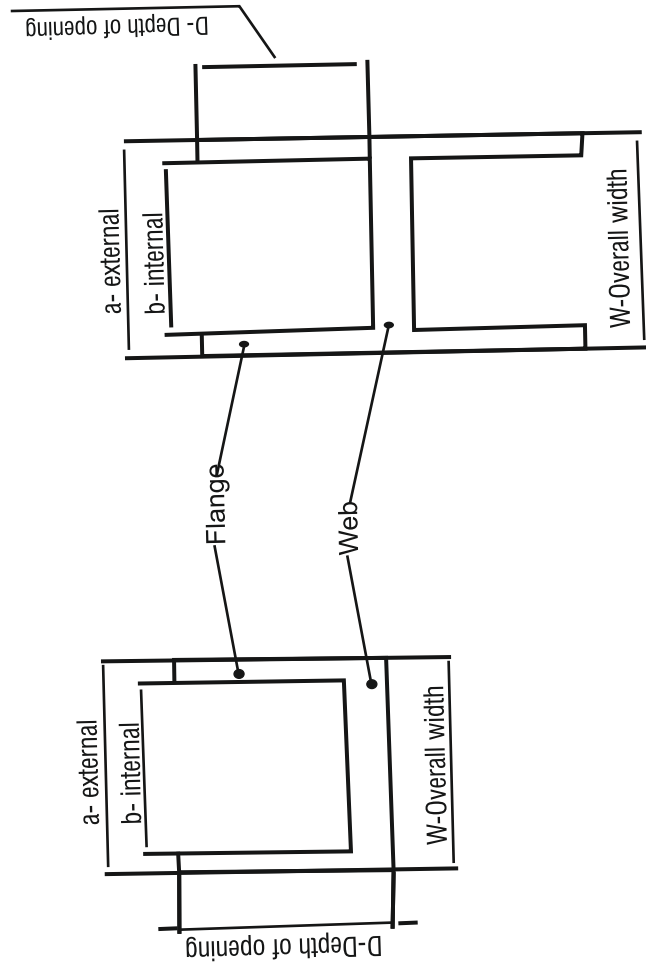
Channel and I-beam dimensions for tolerances purposes(see table-8)
